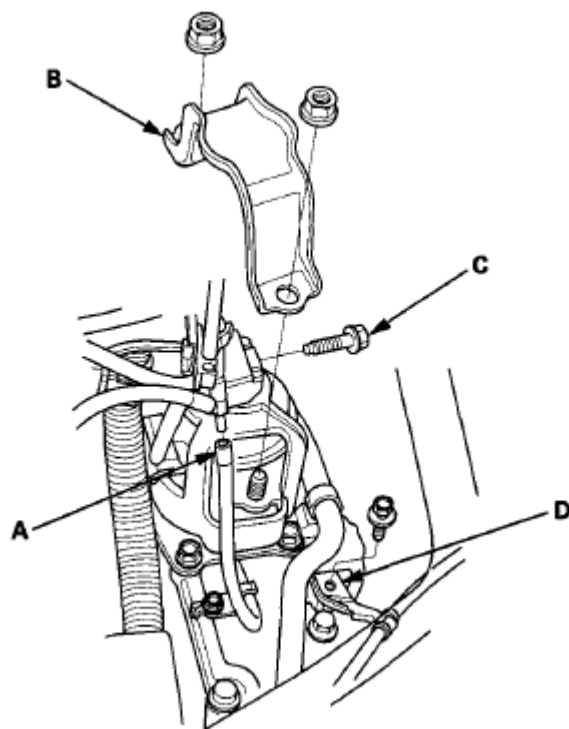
Removing Rear Engine Mounting Mount Stop And Rear Engine Mount Bolt
